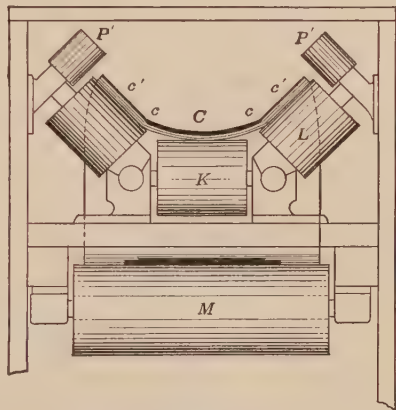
Stepped-ply Belt on 45° Troughing Idlers with Side-guide Pulleys, 1896.
